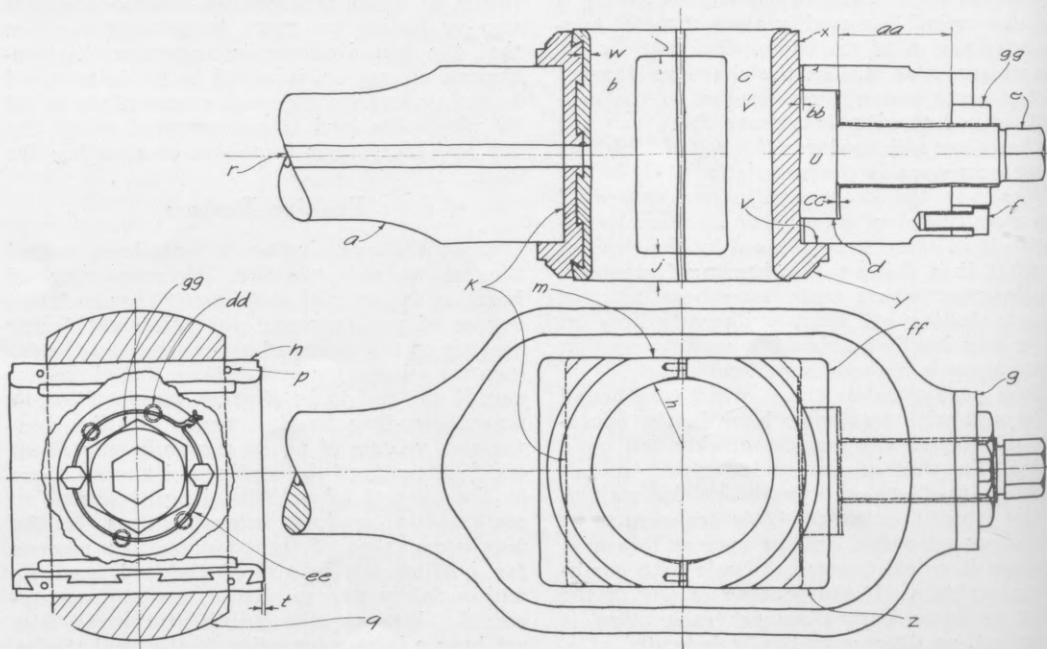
Wristpin box assembly showing method of fitting and holding the brasses
